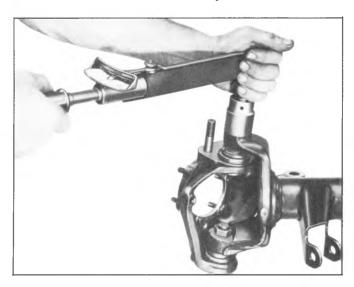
C-15K--Torquing Upper Ball Socket Nut
